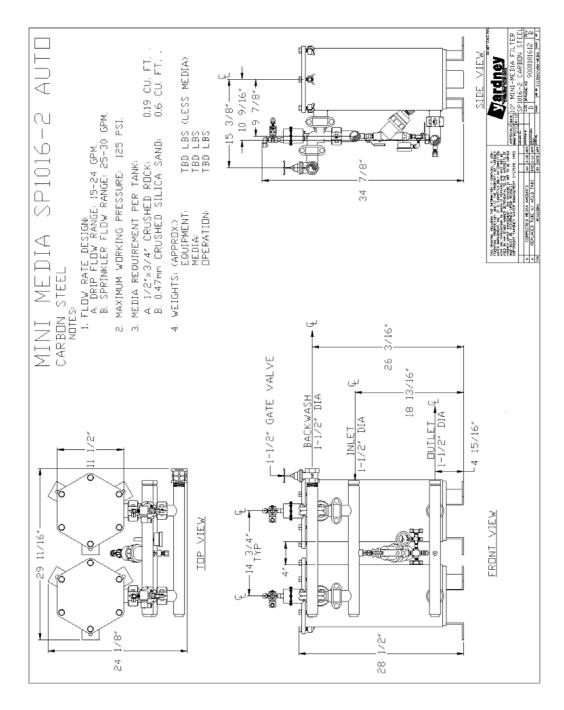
MINI MEDIA TWO TANK ASSEMBLY.
